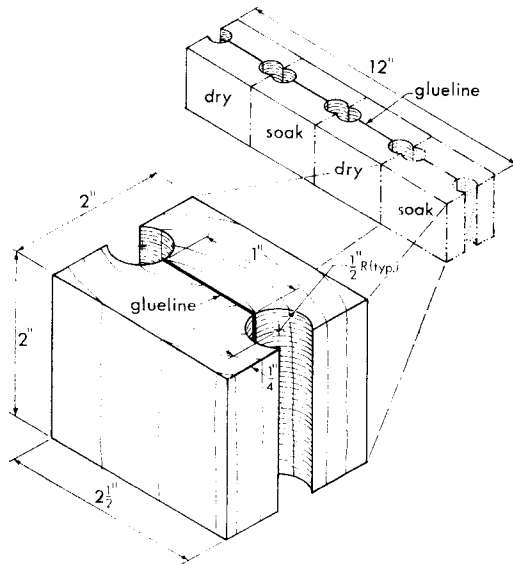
Test billet and ASTM tension-perpendicular-to-glueline specimen.
